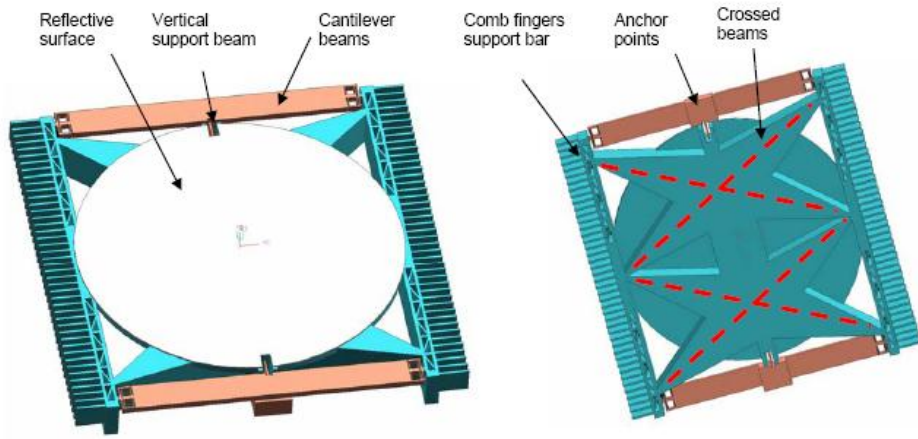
Mechanical design of the cantilever beam scanner a) top-view b) bottom view
